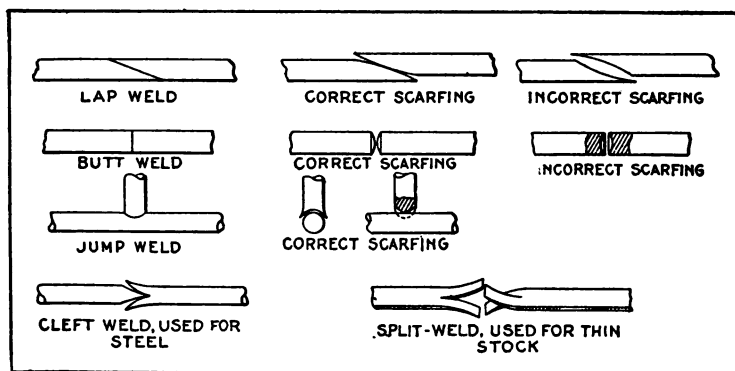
TYPES OF WELDS WITH CORRECT AND INCORRECT SCARFING
